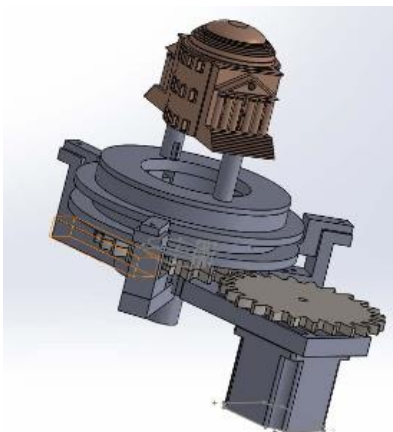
Rotating Rotunda assembly from 2016 pinball project
